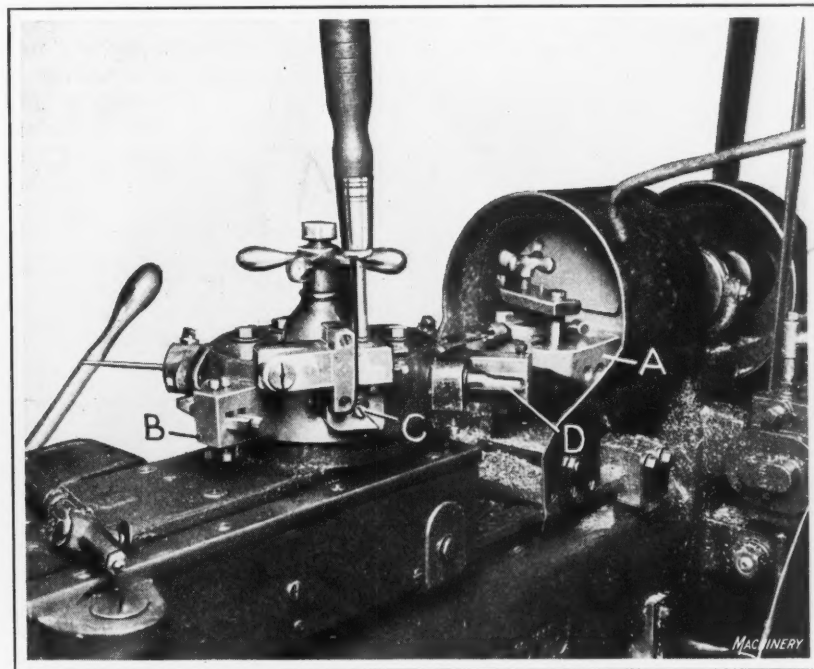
Set-up of Hand Screw Machine, showing Special Tooling
